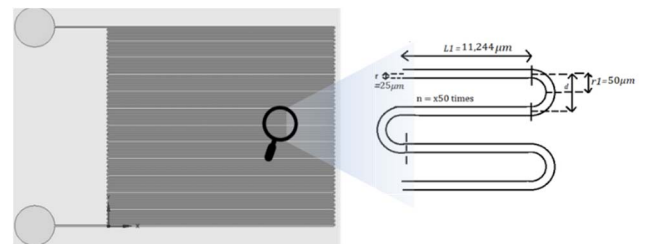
A CAD model of the strain gauge sensor with zoomed-in serpentine dimensions
